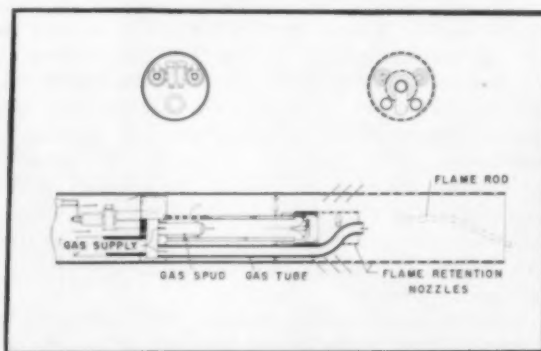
Sectional drawing of FP gas-electric ignitor, Fig. 3, (patent applied for) labels the working parts
